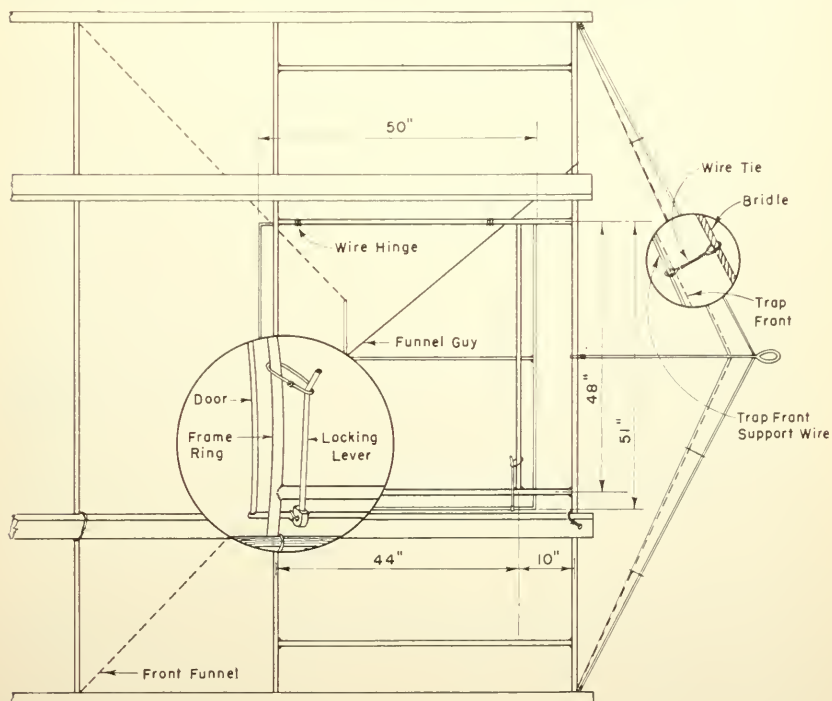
General diagram of the front of the trap, showing the door and bridle assembly.
